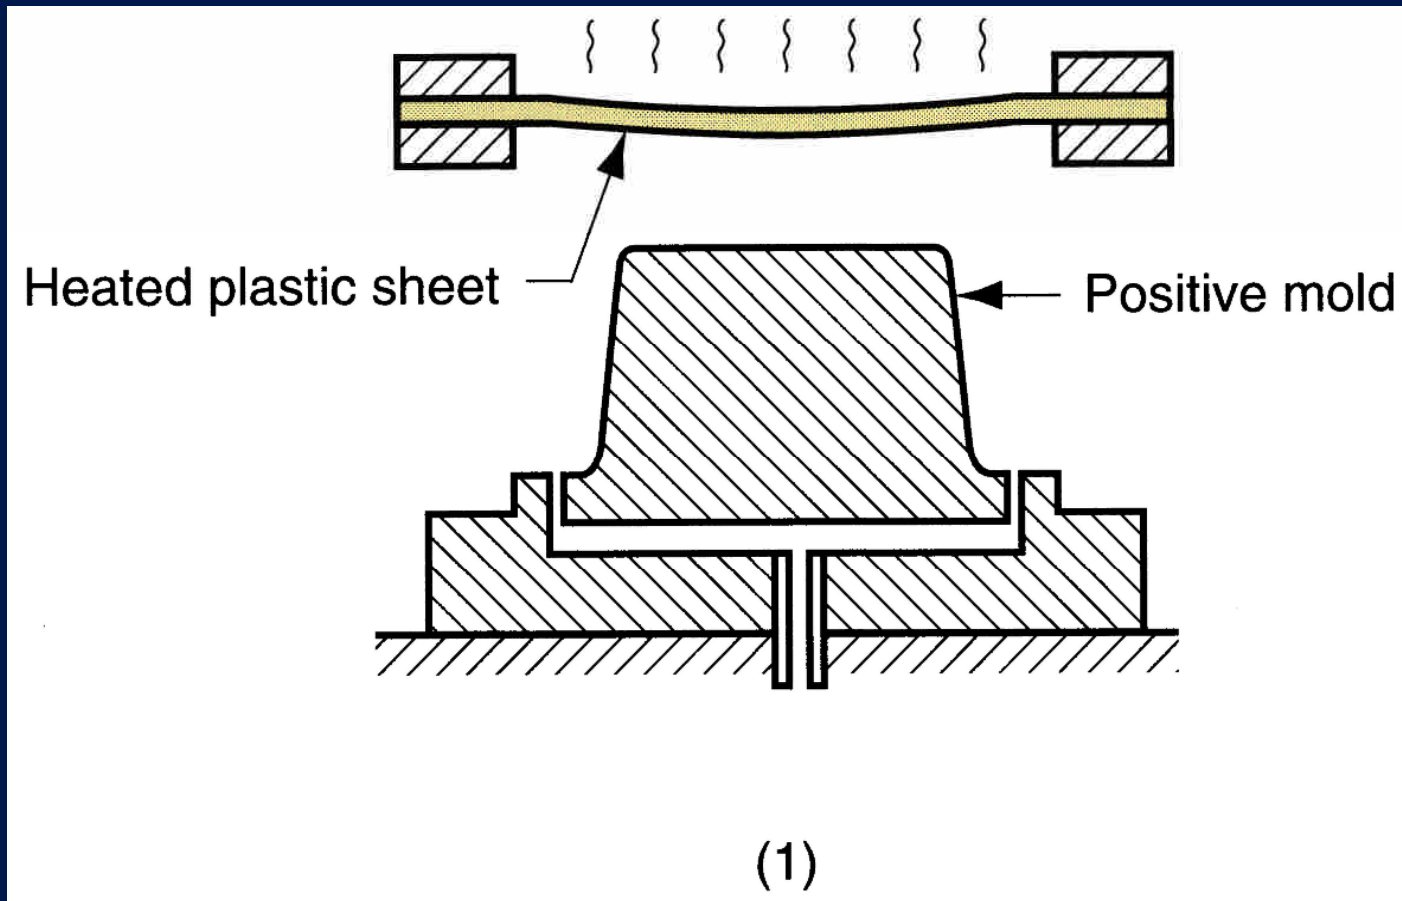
Use of a positive mold in vacuum thermoforming:
